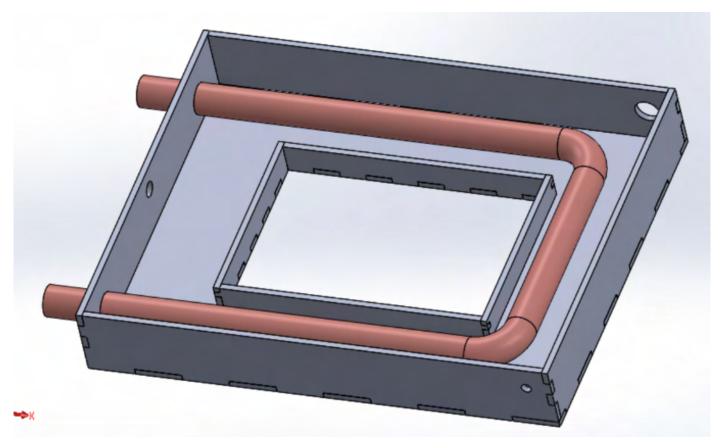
SOLIDWORKS drawing without the lid on the updated assembly.
